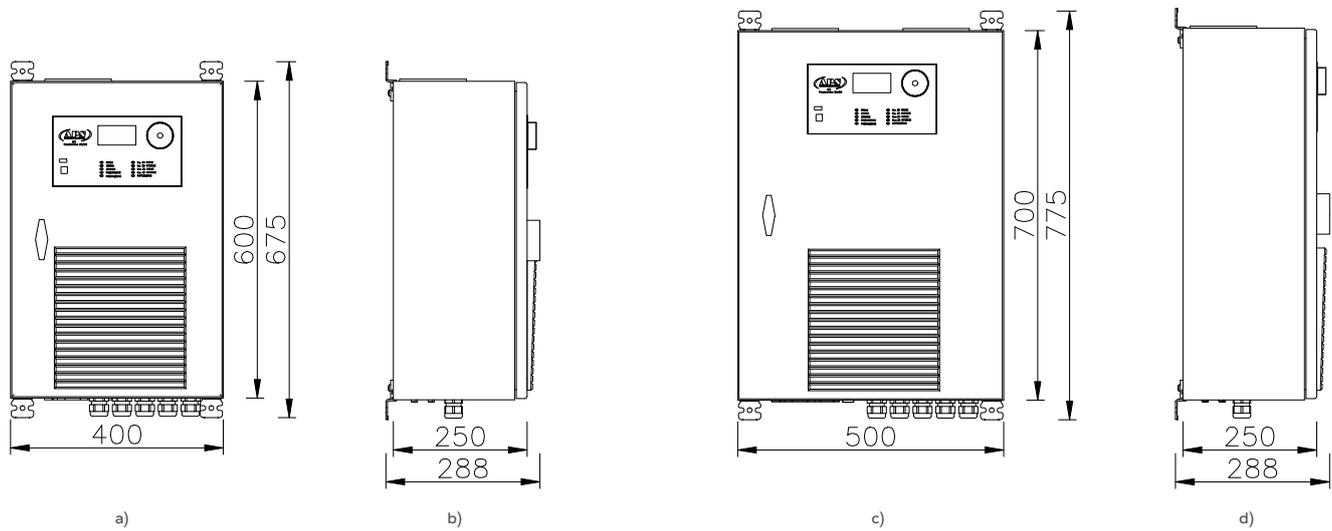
Views with dimensions of the EPI type converter compact (wall-mounted enclosure):
